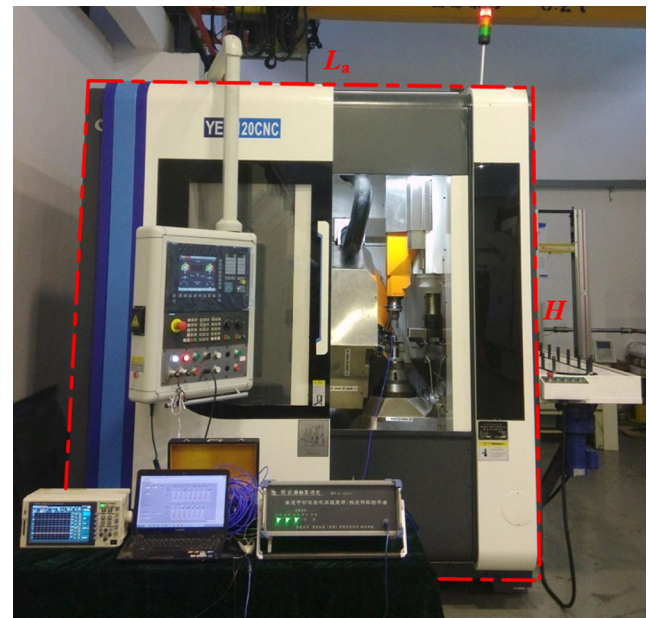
Schematic diagram of dry hobbing machine tool dimension
